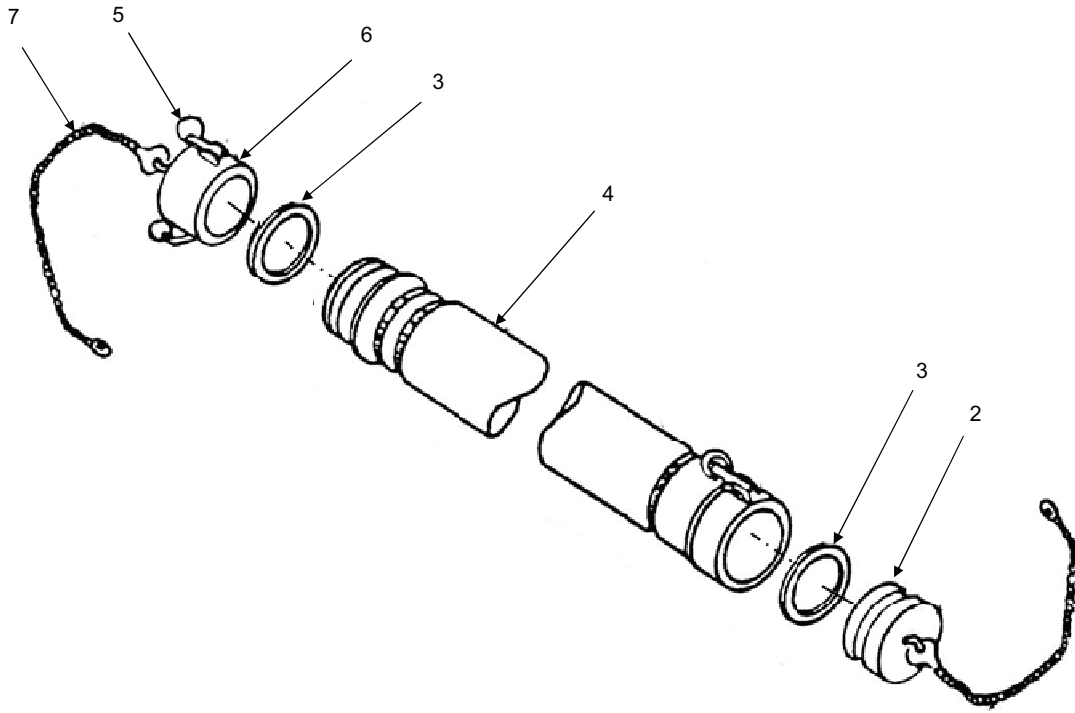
Berm Liner Drain Hose Assembly, Cam x Cam.
